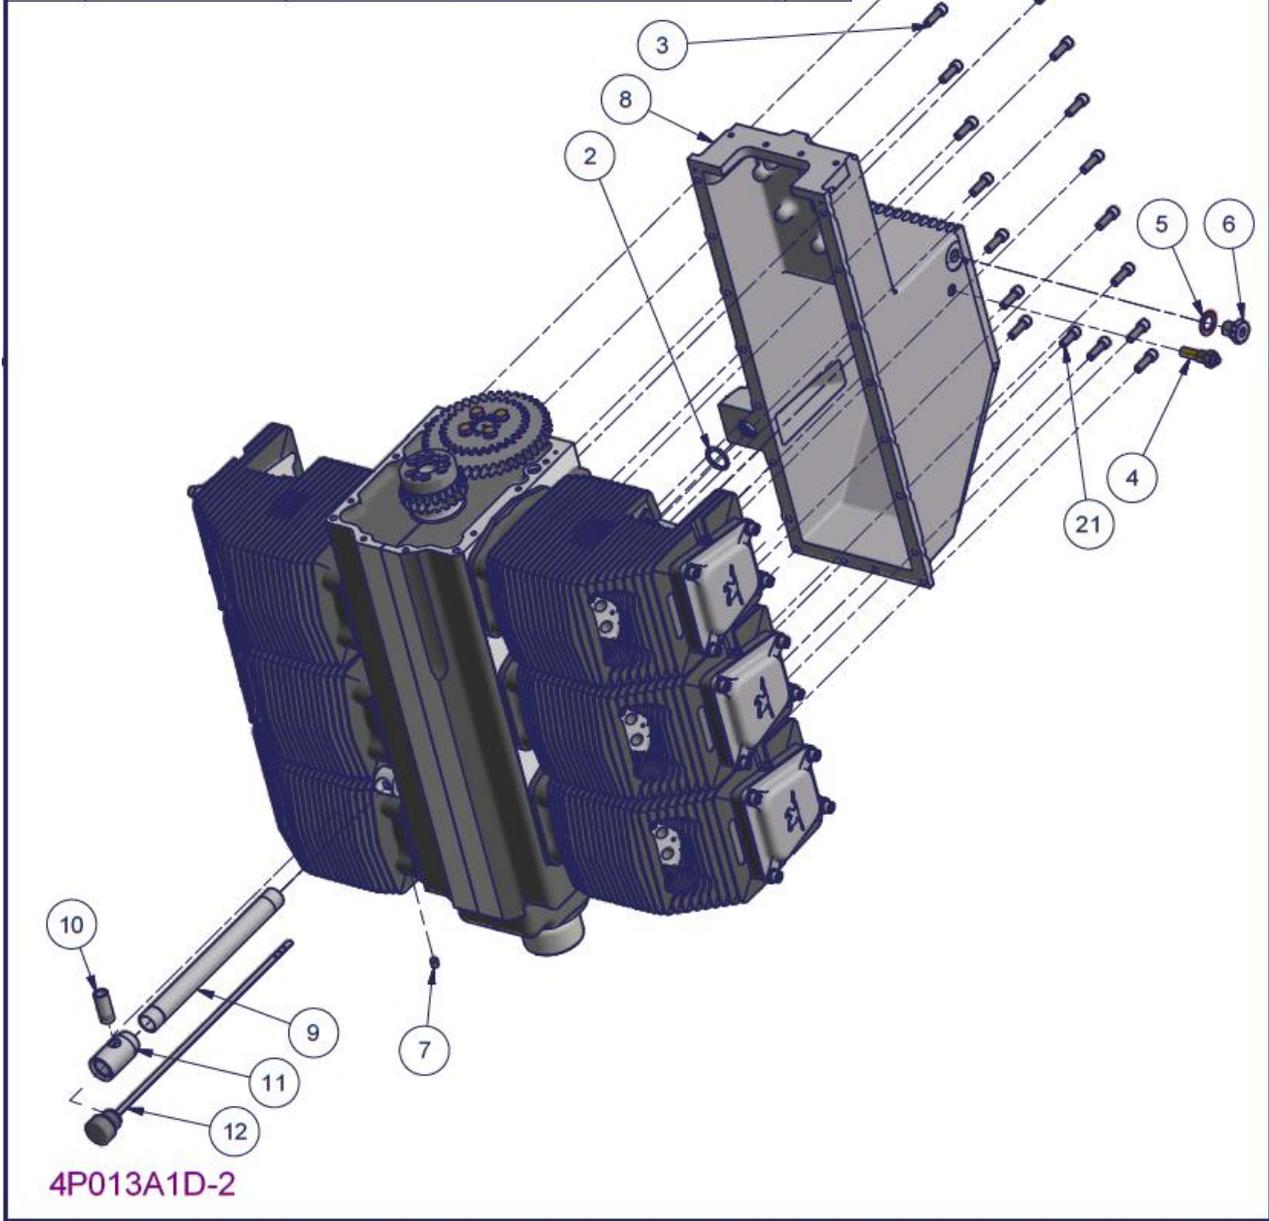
3300 Sump installation (No plenum) – Parts List
